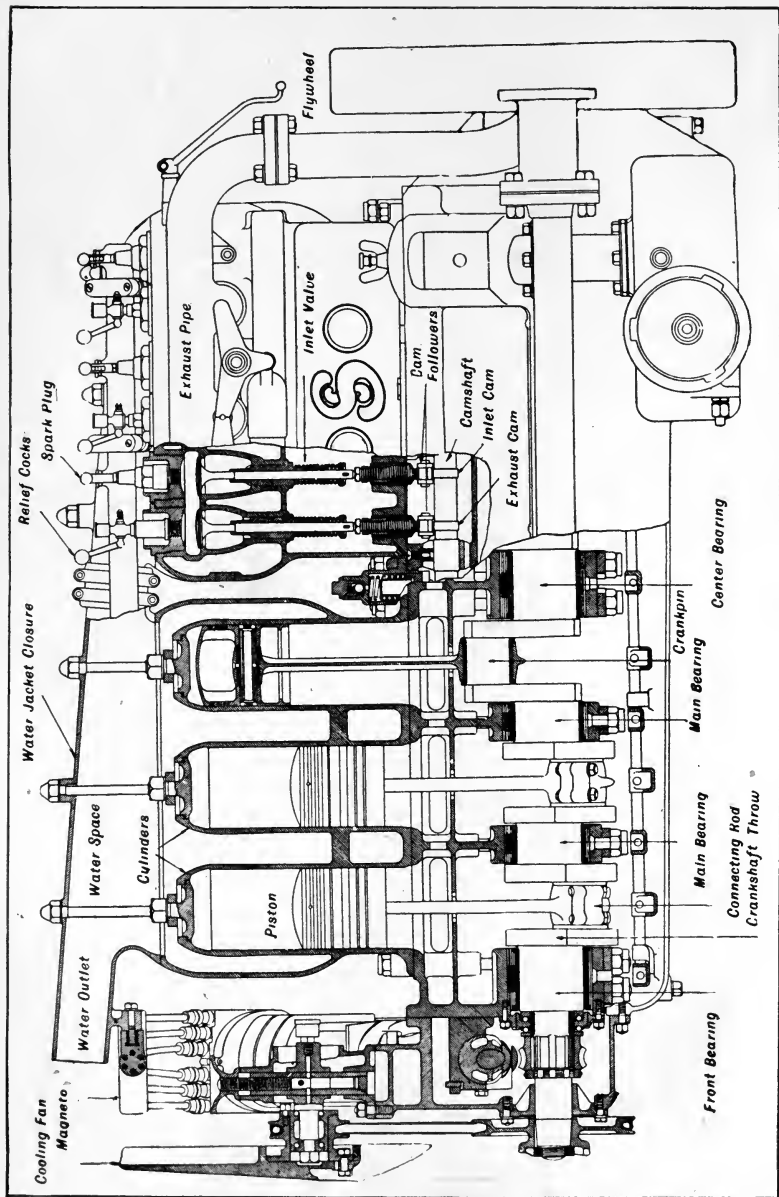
Part Sectional View of Sheffield Simplex Six-Cylinder Motor, Showing Use of Block Castings, Seven-Bearing Crank Shaft and Other Constructional Details. Note Exceptionally Good Water-jacketing of Cylinders.
